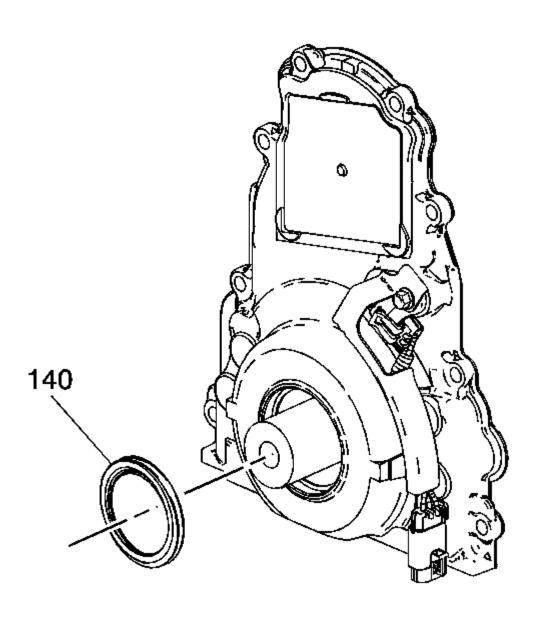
Crankshaft Front Oil Seal Courtesy of GENERAL MOTORS CORP.
